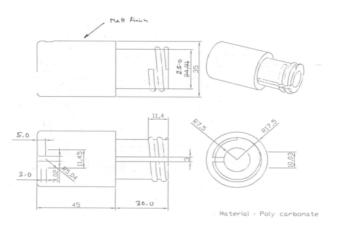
Final drawing of one component of the 'handle' in detailed design stage (exact reproduction of drawing)
